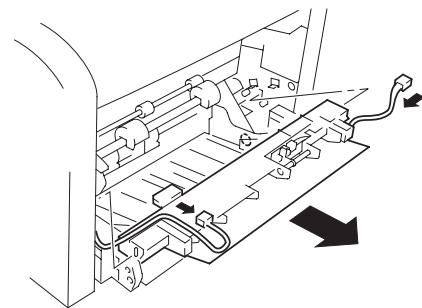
Removing the Paper Feed Upper Guide Assy
